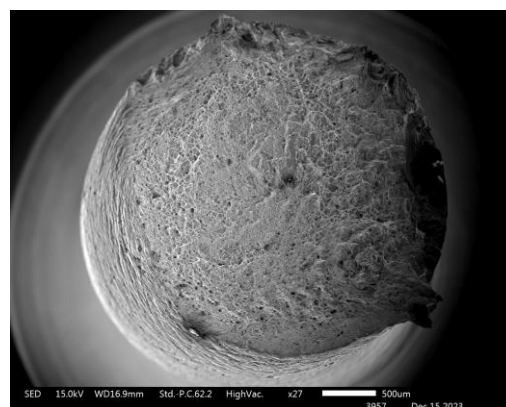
Fracture surface of specimen C (10^{-7} 1/s) by scanning electron microscope
